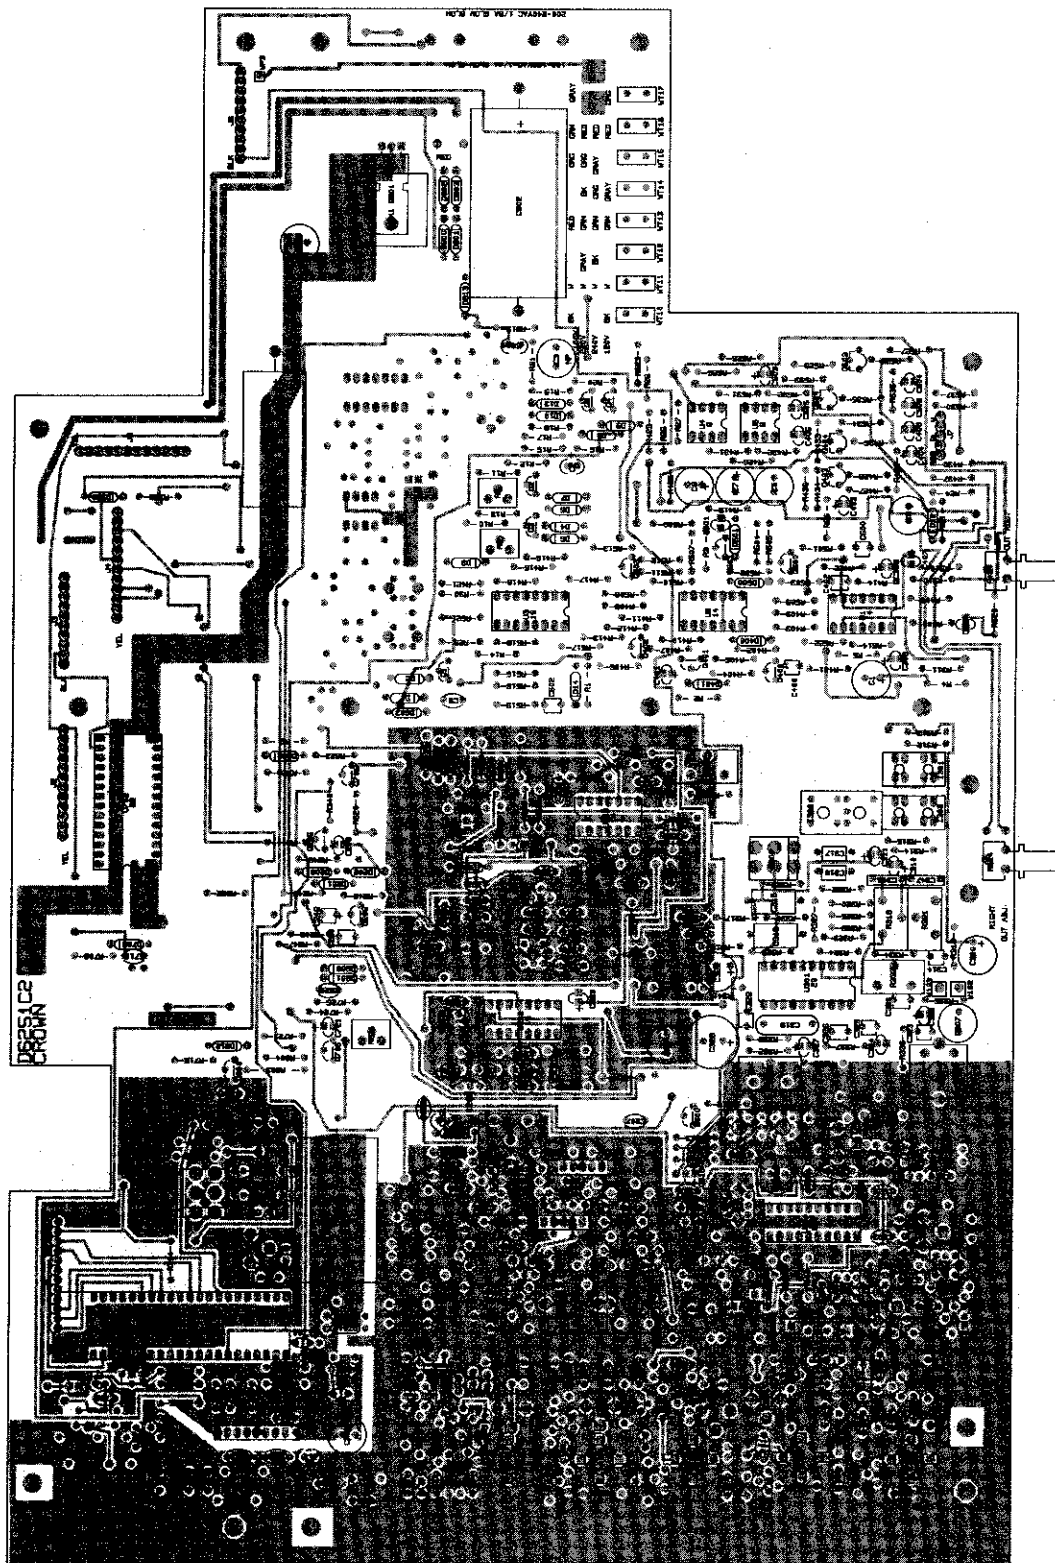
Main Module Component Board Layout #Q42542-3
